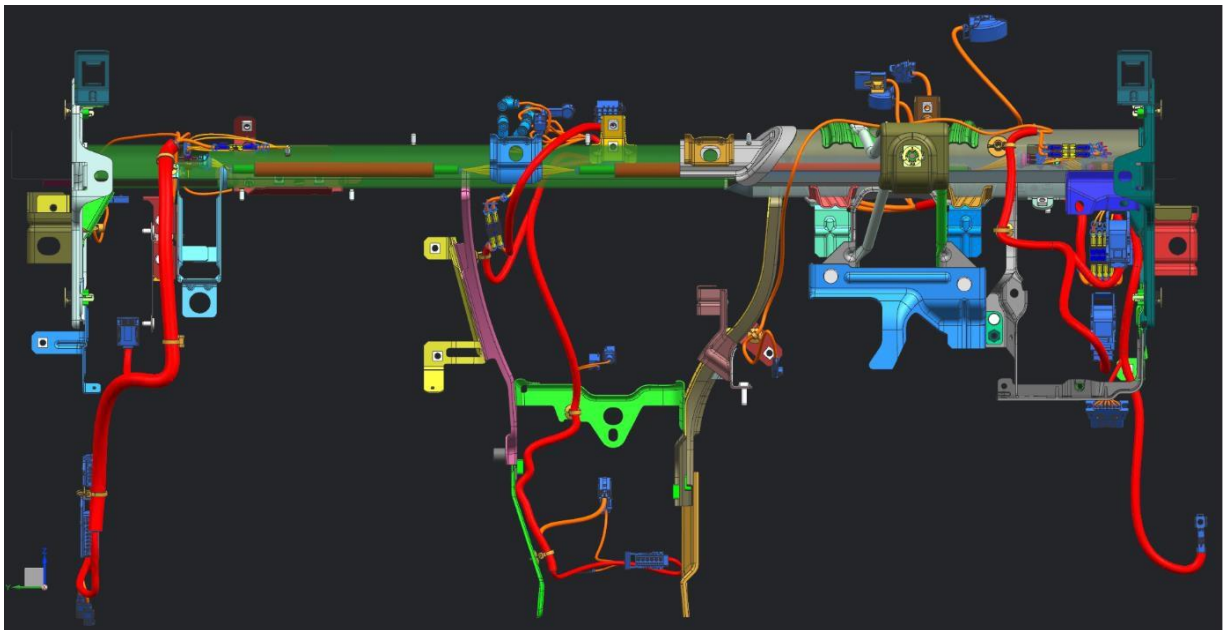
Cross-Car Beam structure and new cable guidance layout back-view
